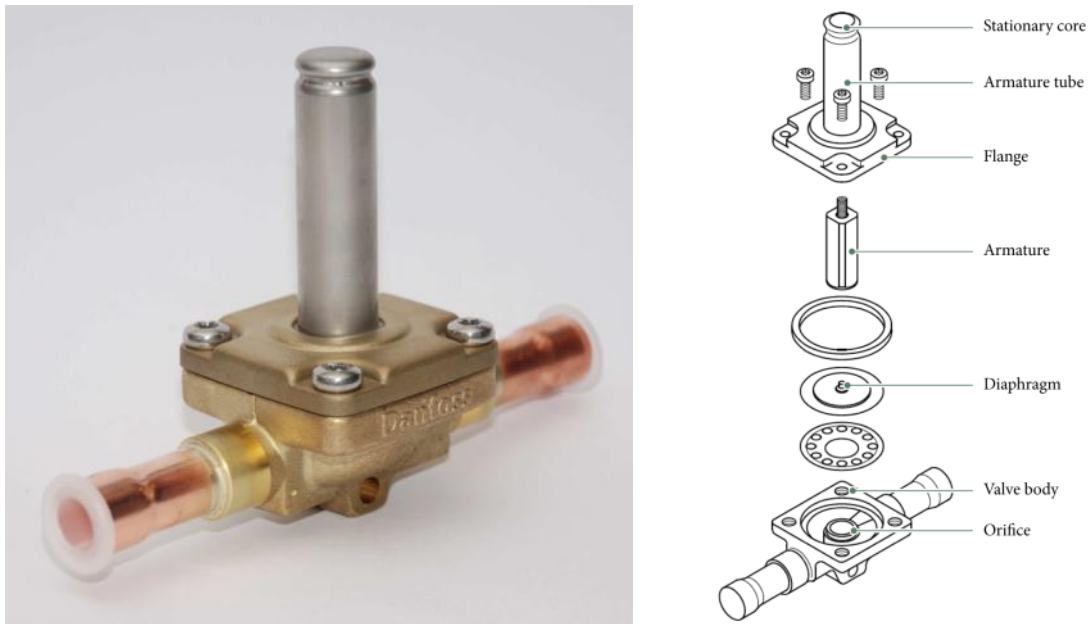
To the right: A typical refrigeration valve without a coil. The coil can be mounted on the stainless steel tube on top of the valve (the “armature tube”). To the left: An exploded view of the valve. The armature moves inside the armature tube and the stationary core is mounted inside the armature tube. Some valve types have a diaphragm, and some operate without. This valve comes with copper tubes as the connection type (see the picture). Copper tubes are soldered to the pipeline and are used in refrigeration systems.
